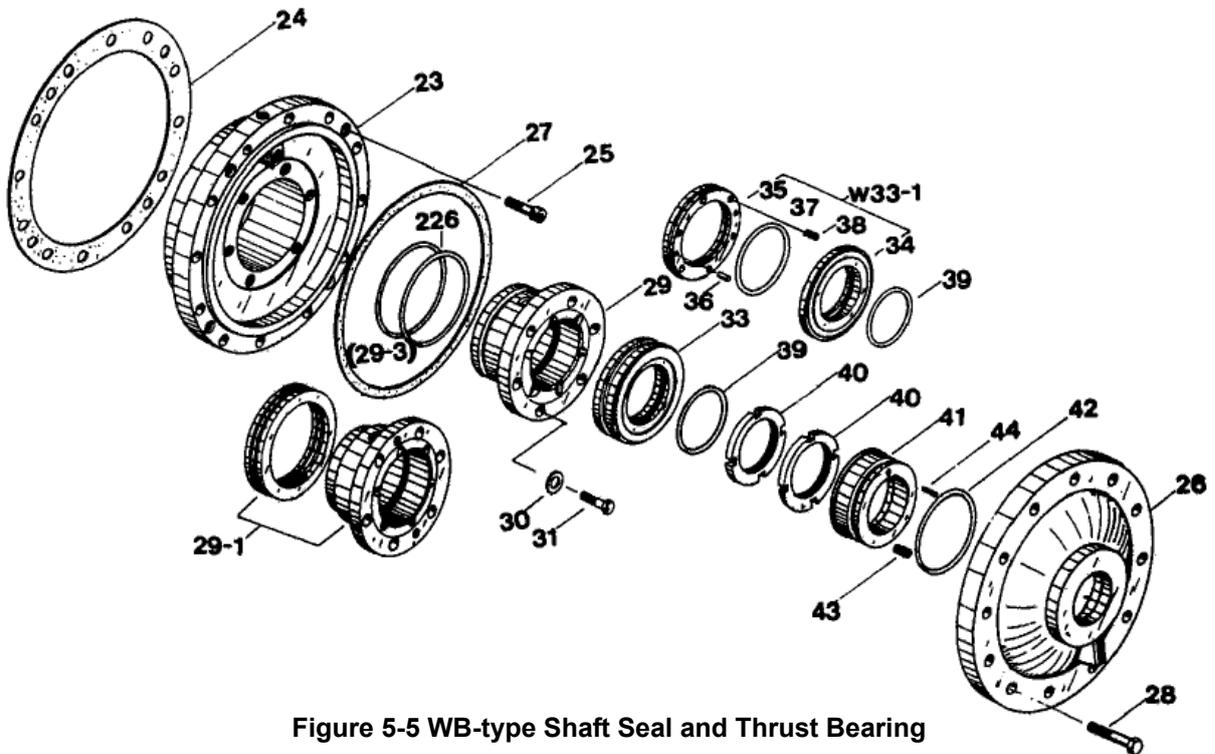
WB-type Shaft Seal and Thrust Bearing
